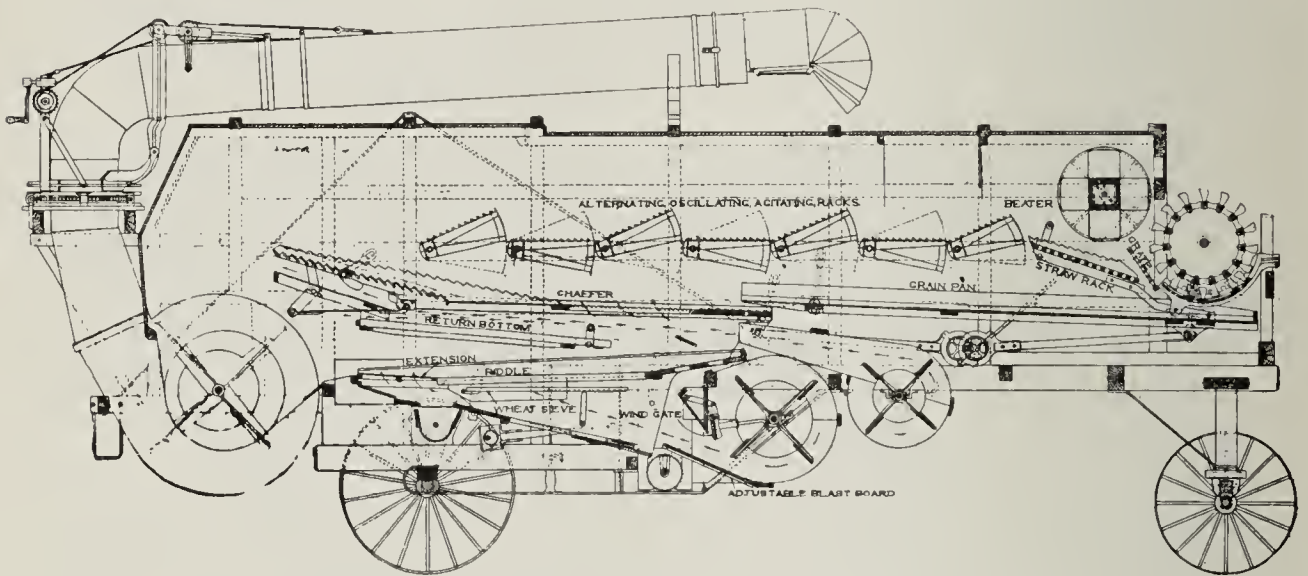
SECTIONAL VIEW OF BAKER SEPARATOR.
